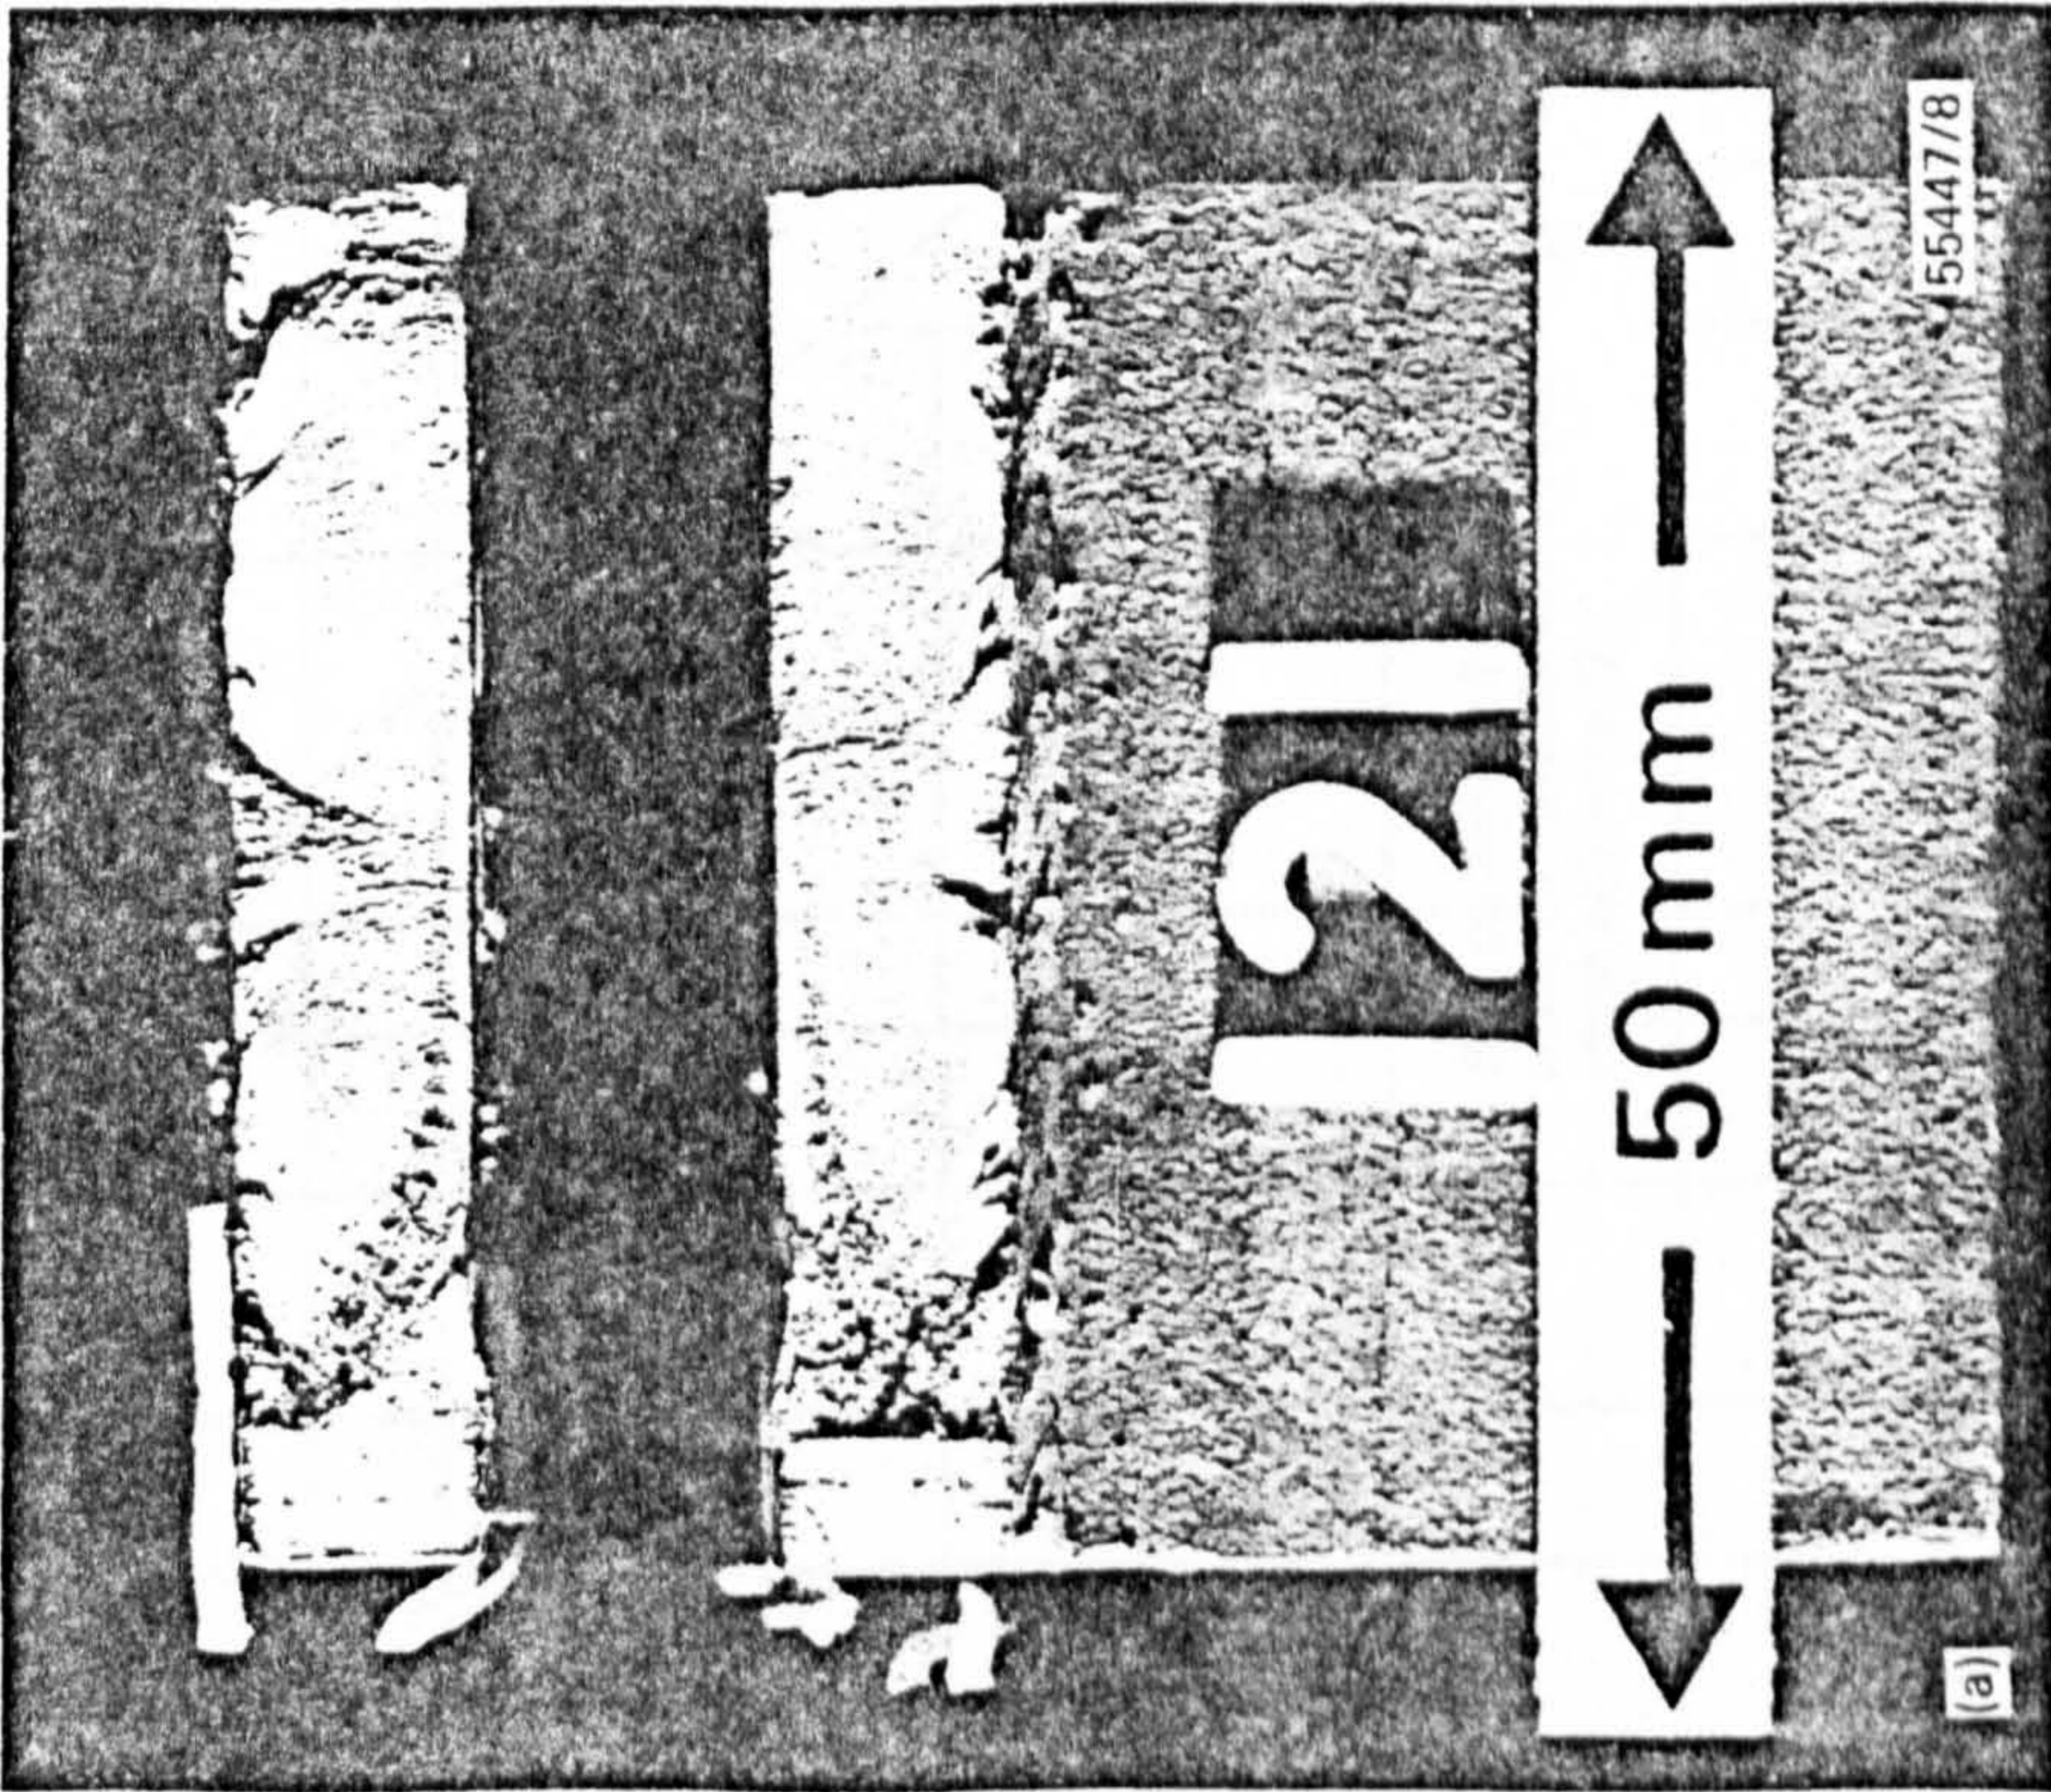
Fatigue fracture surfaces produced in:
